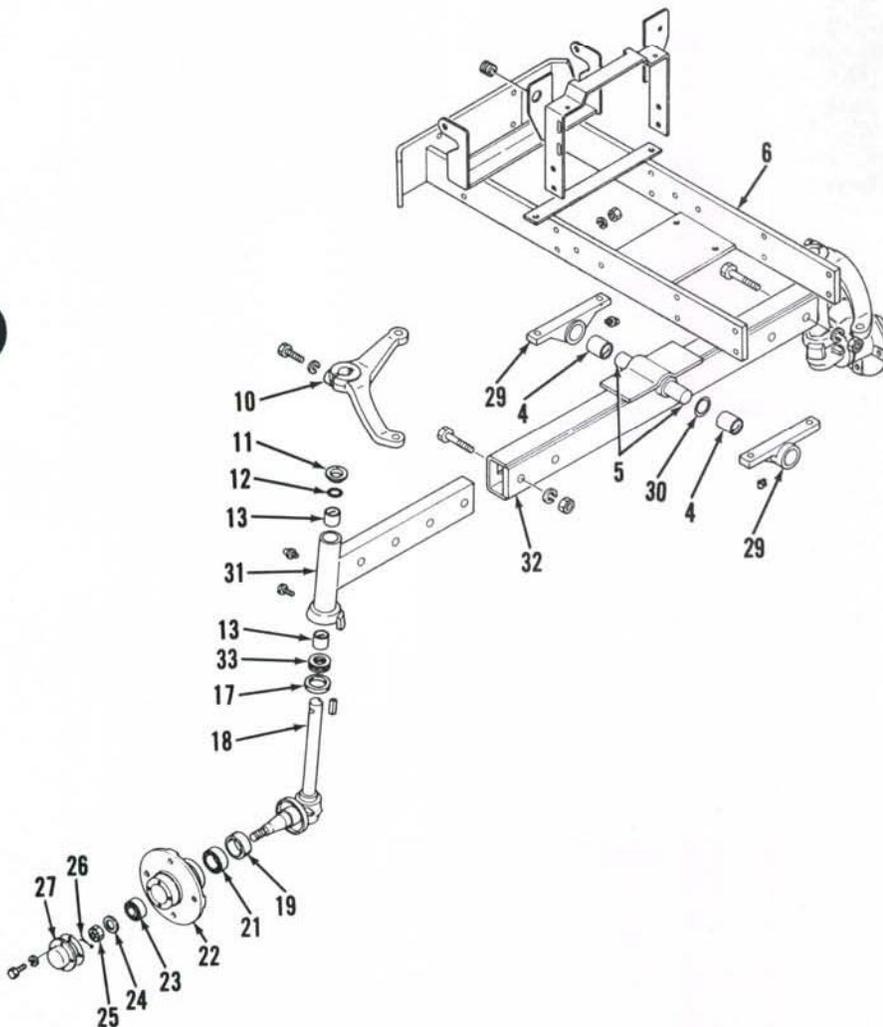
A—Exploded view of adjustable axle available for YM195 and YM240 models. Except for adjustable width feature, heavy duty non-adjustable axle is similar.
